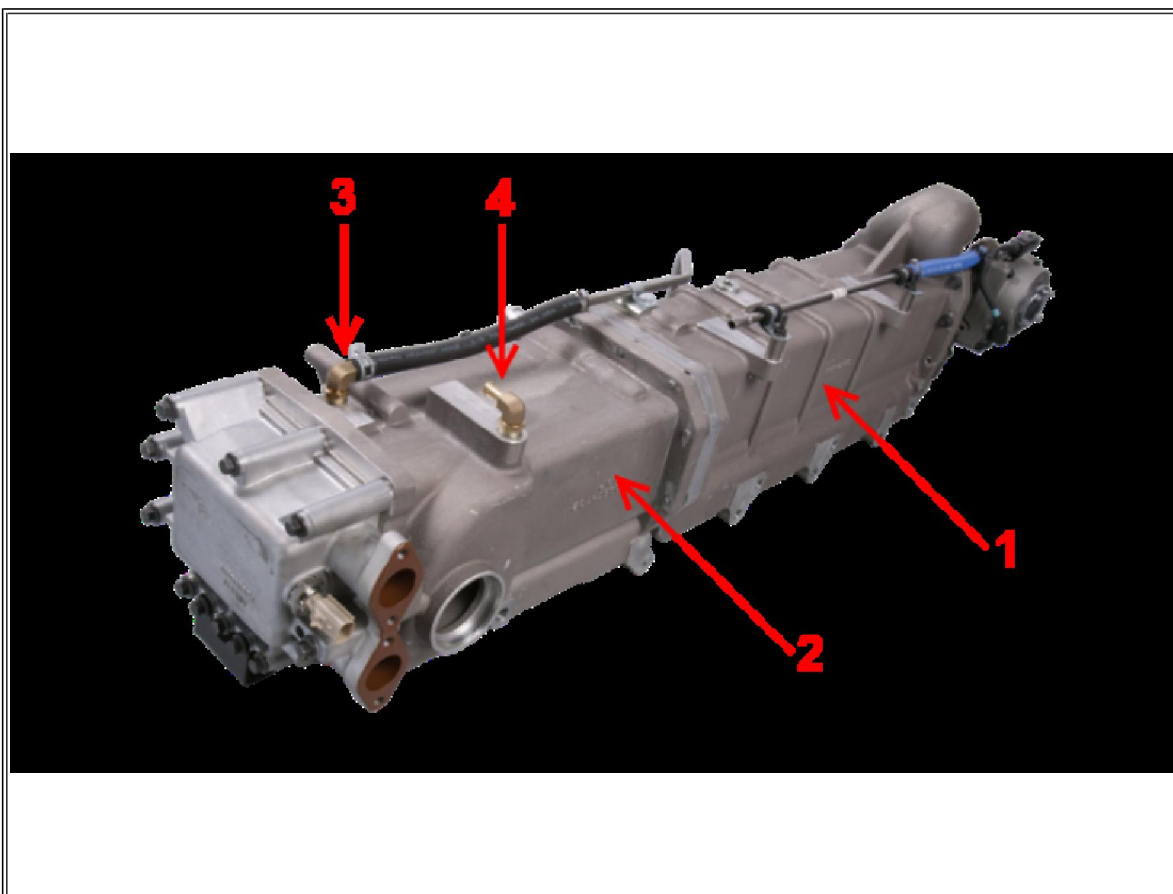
2010 MaxxFace 11/13 EGR Cooler Assembly
